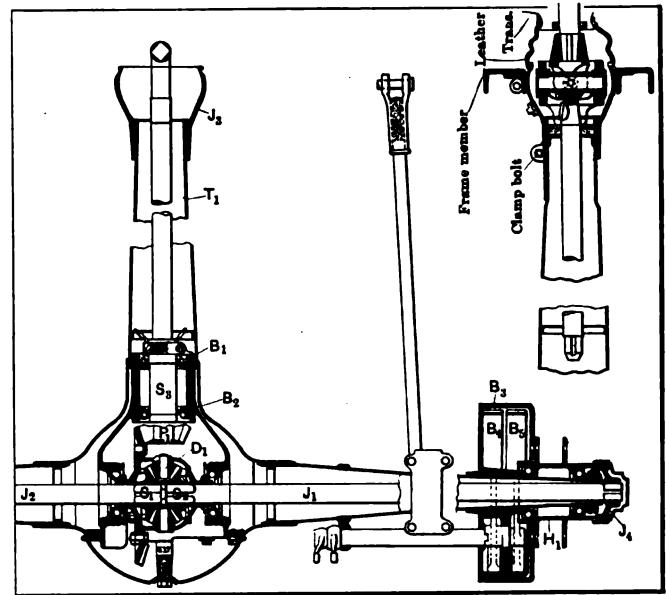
Pressed-steel type of live rear axle, section to show bevel differential and two pairs of internal expanding brakes
